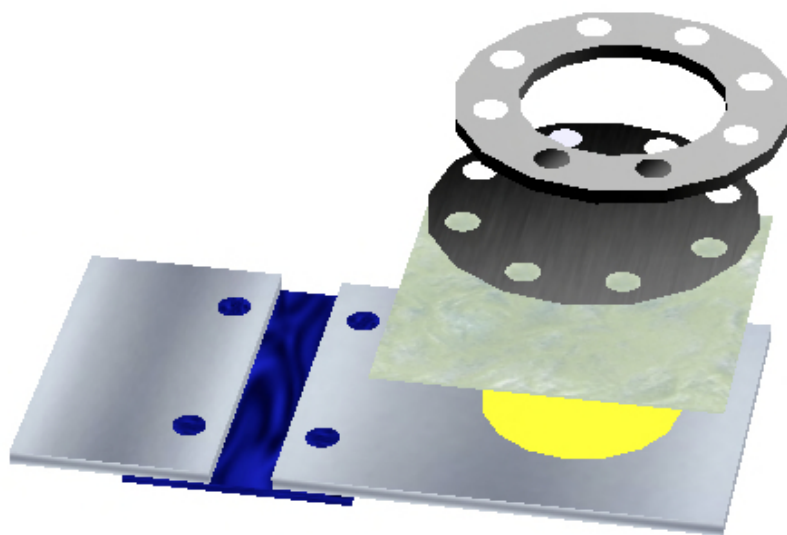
3-dimensional sketch of the sample holder showing the mounting of the sample onto the holder.
